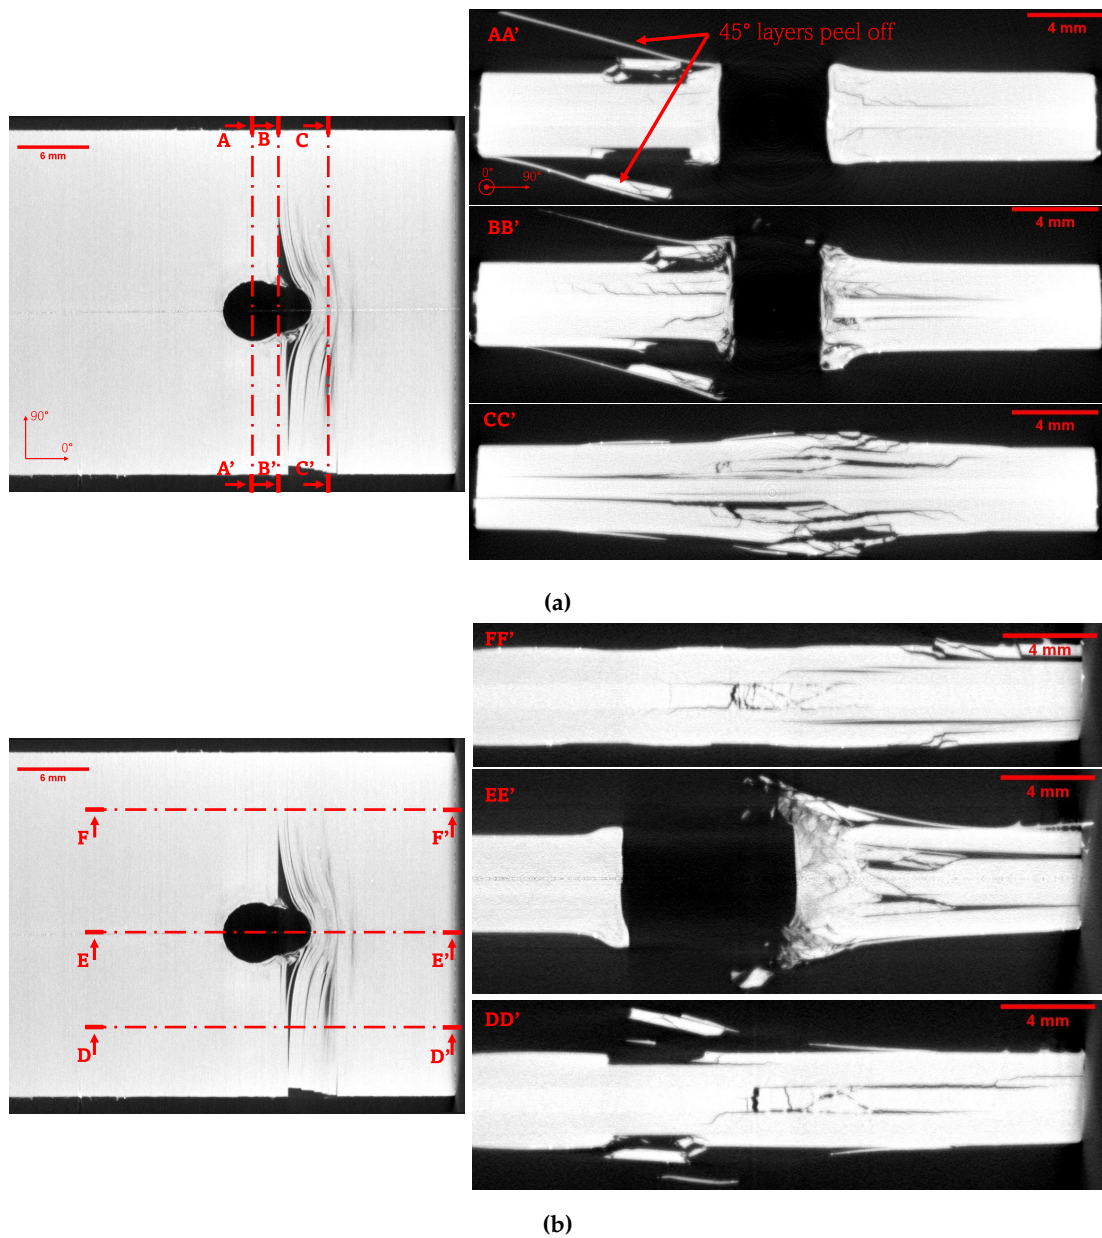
XCT scans of the cross-sections of a pin load specimen with a $[\pm 45]_s$ binding tested until failure. (a) Cross-sectional view of the width of the specimen. (b) Cross-sectional view of the length of the specimen.
